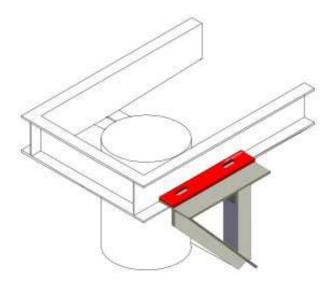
Illustration of 12 mm Thickening Plate for Attachment of Motor Mount to Fan Skid.
